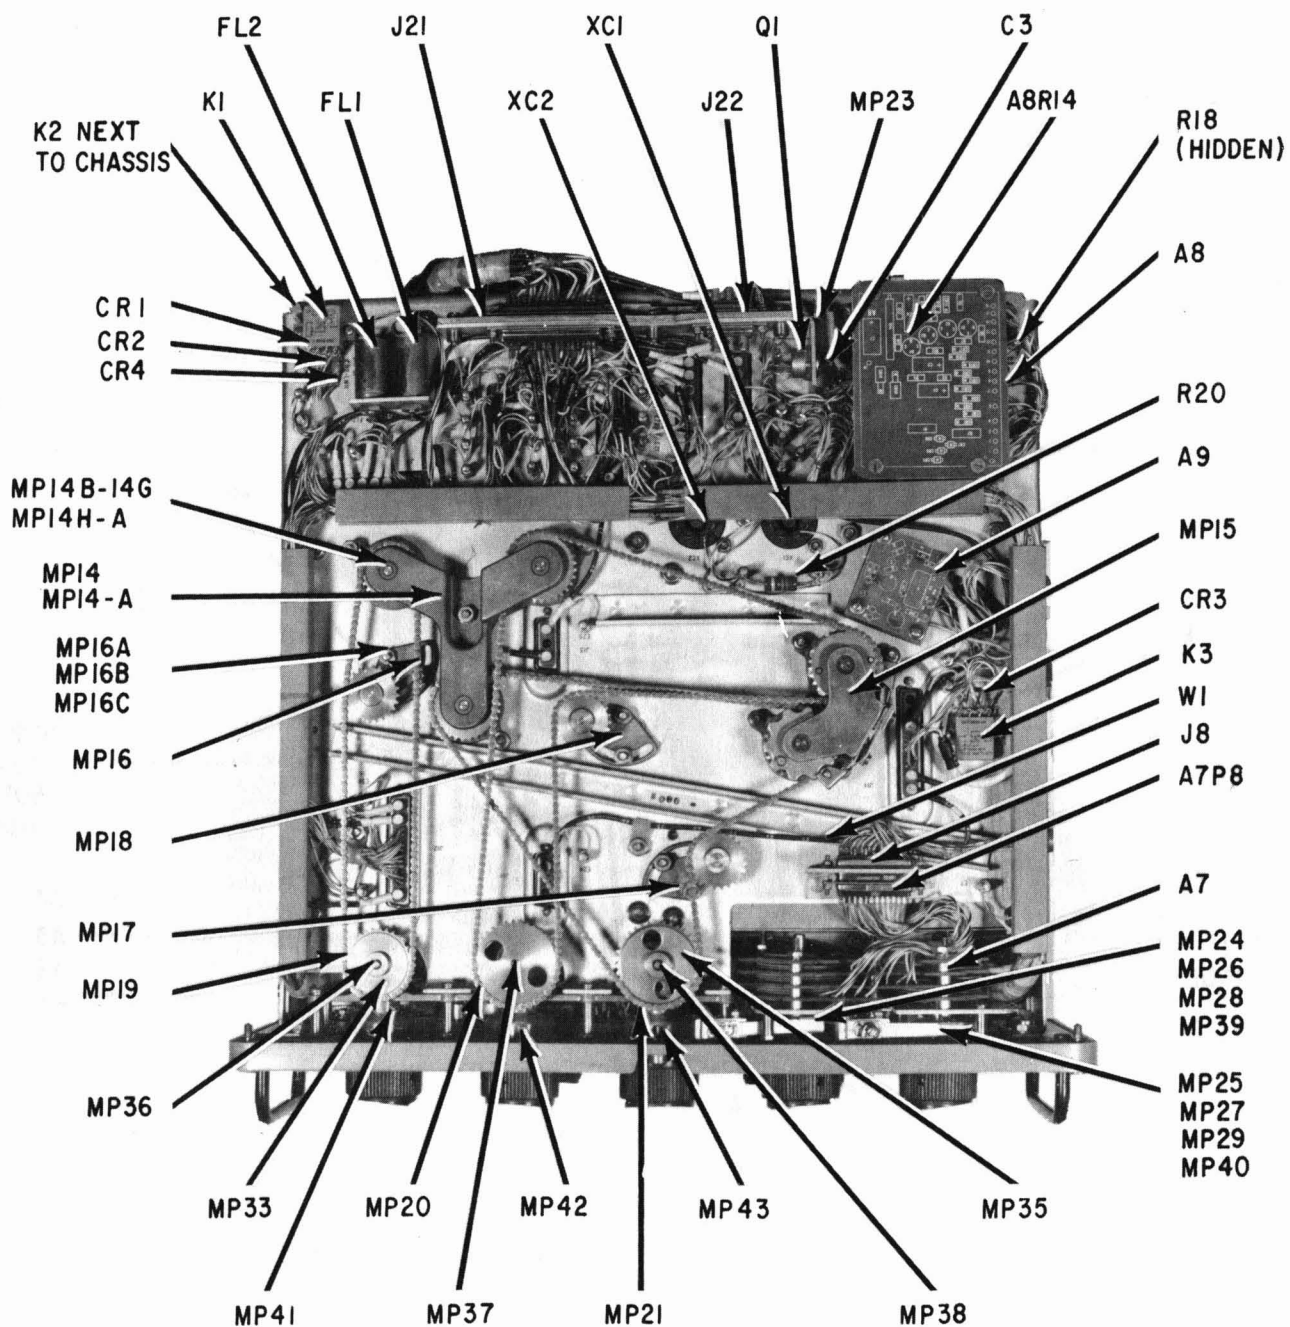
R-1051/URR Chassis Main Frame, Bottom View, Component Location
